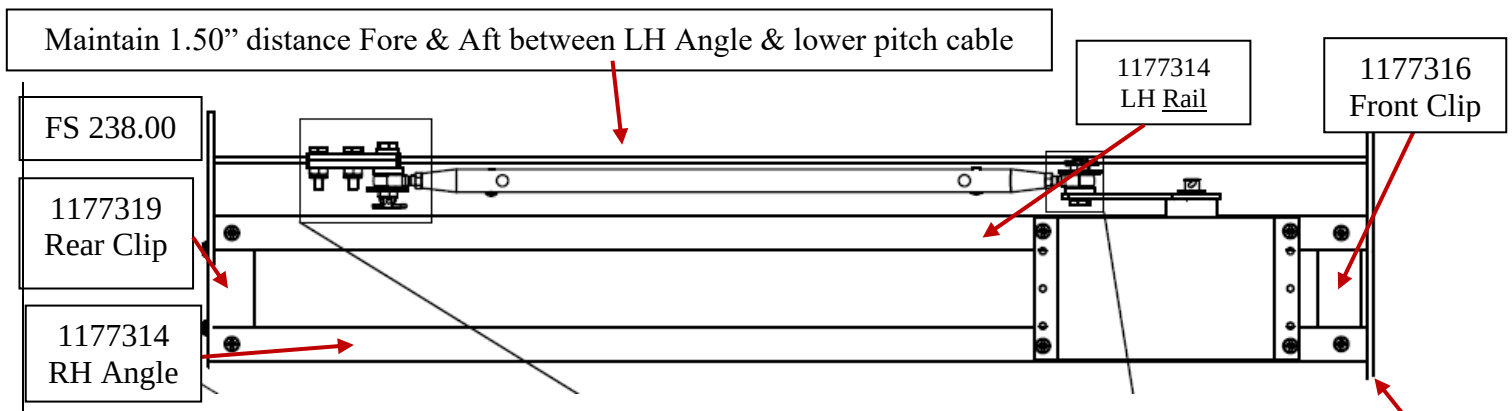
PITCH SERVO BRACKET ASSEMBLY
